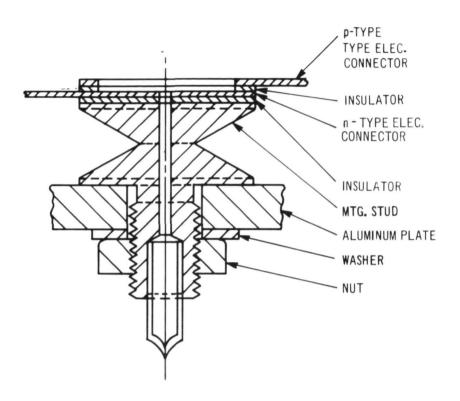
One Piece Copper T- Mount Stud - Cold Stack Design - Aluminum Plate
